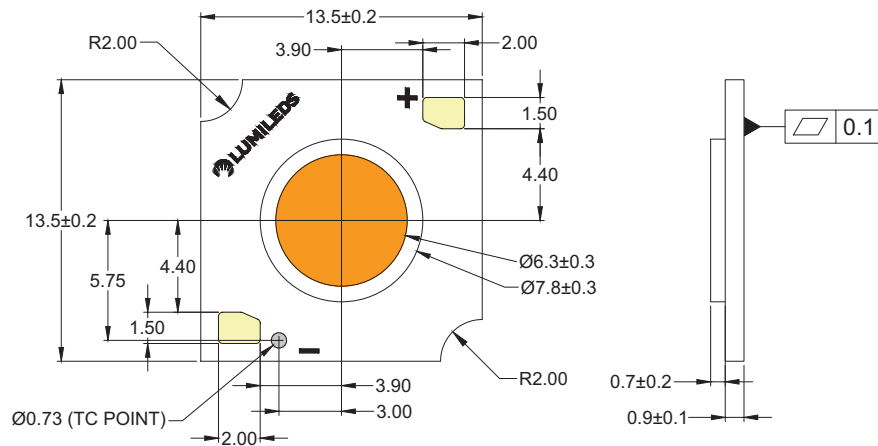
Mechanical dimensions for L2C6-xxxxxL02x0600
